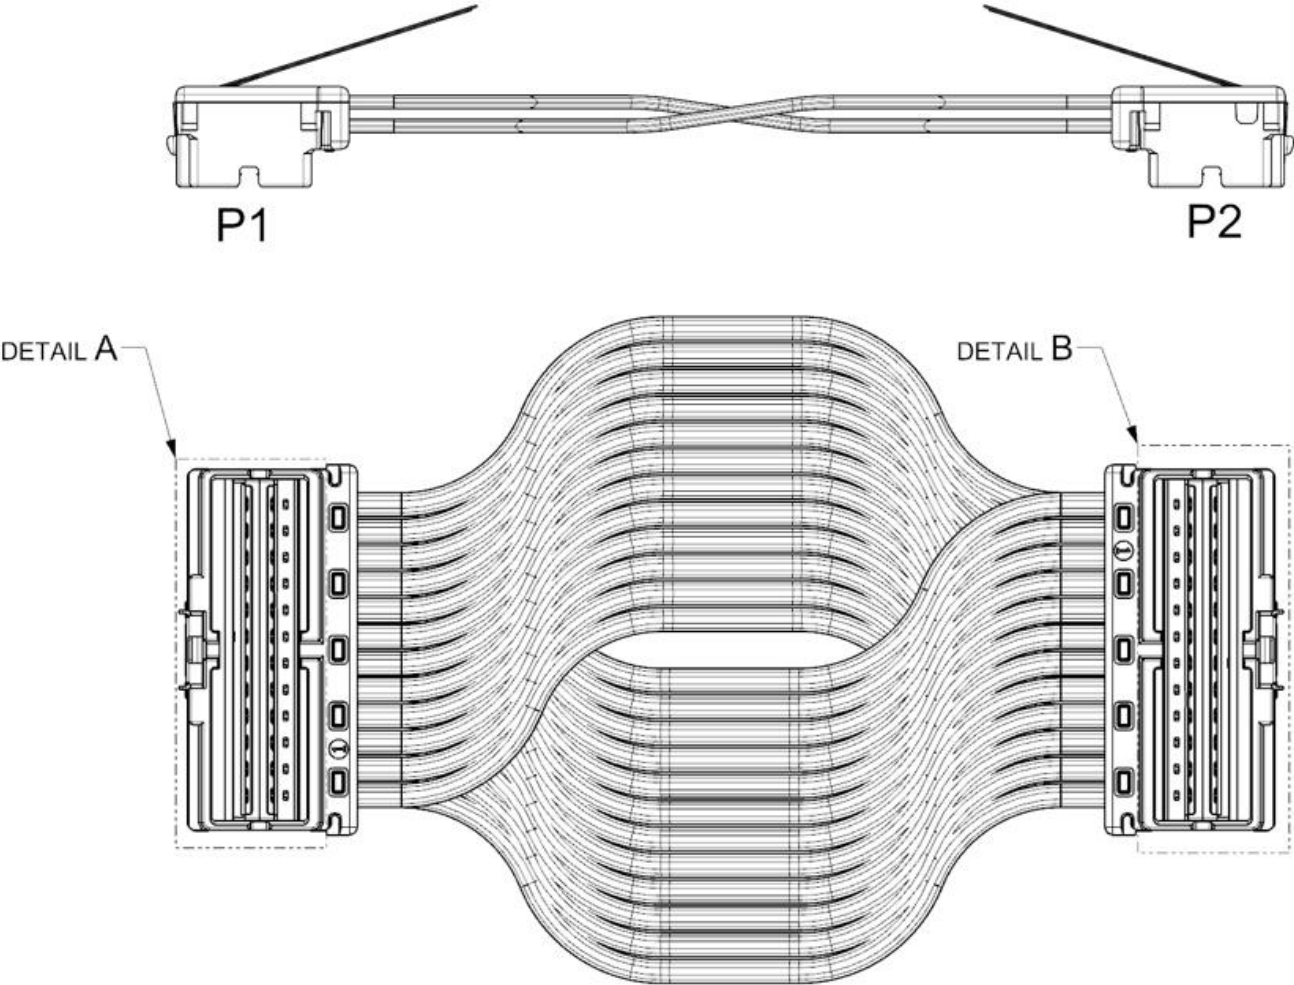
72-Pin Cable Assembly Free-Side Connector Numbering
